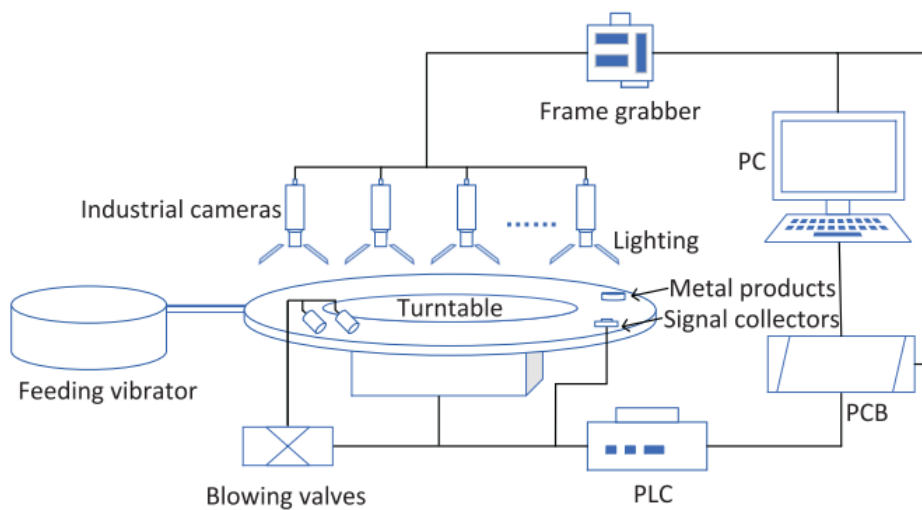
Surface defect detection system using seven Hikvision industrial cameras (Xin et al., n.d.)
